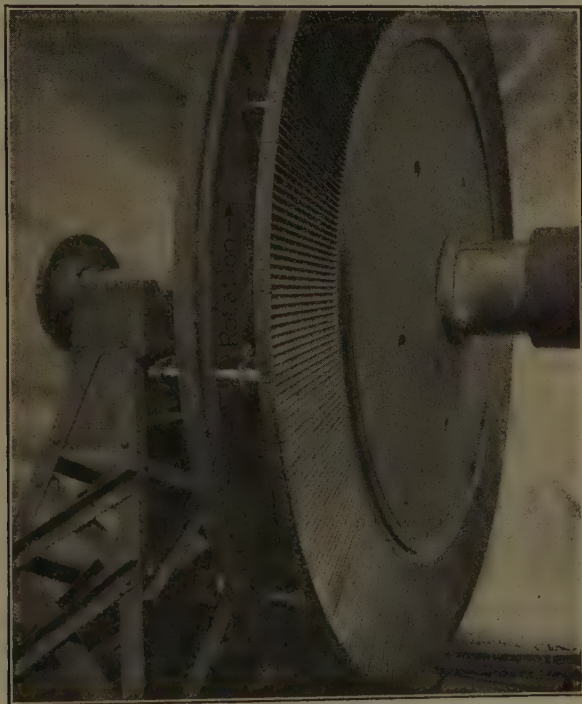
ASSEMBLY OF TEST WHEEL WITH THREE REVOLVING EXPLORING COILS
